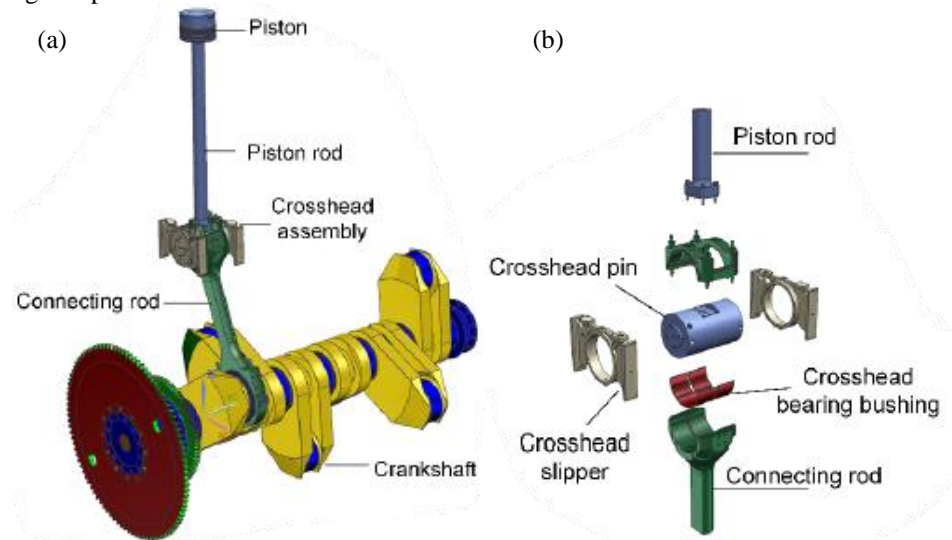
(a) Main running gear of a six cylinder two-stroke marine diesel engine showing the piston and crosshead assembly; (b) Exploded view of the crosshead assembly [4]
